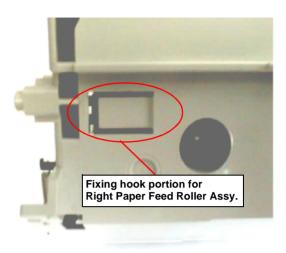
Fixing the Right Paper Feed Roller Assy.
